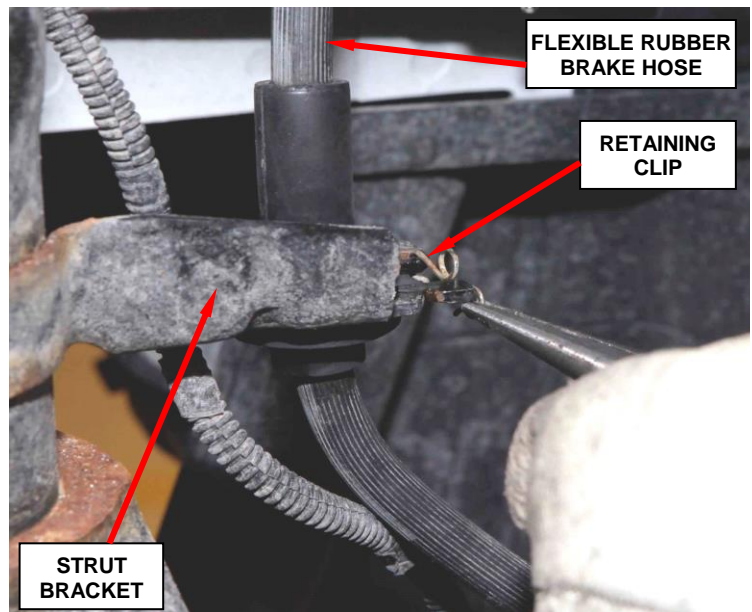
Flexible Rubber Brake Hose Retaining Clip
